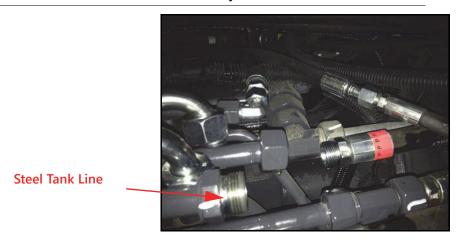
Pressure Hose Installed on the Hydraulic Steering Valve
